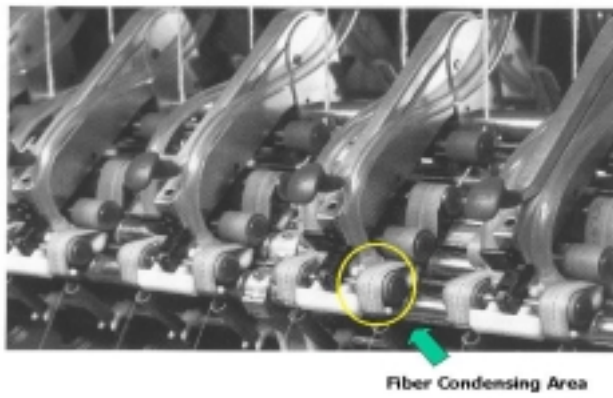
Zinser AIR-COM-TEK 700® condenser ringspinning.
